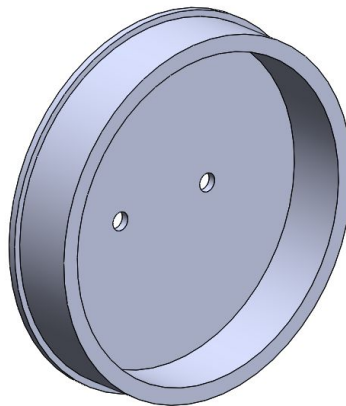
Isometric View of Front Bulkhead with Attached Shoulder
